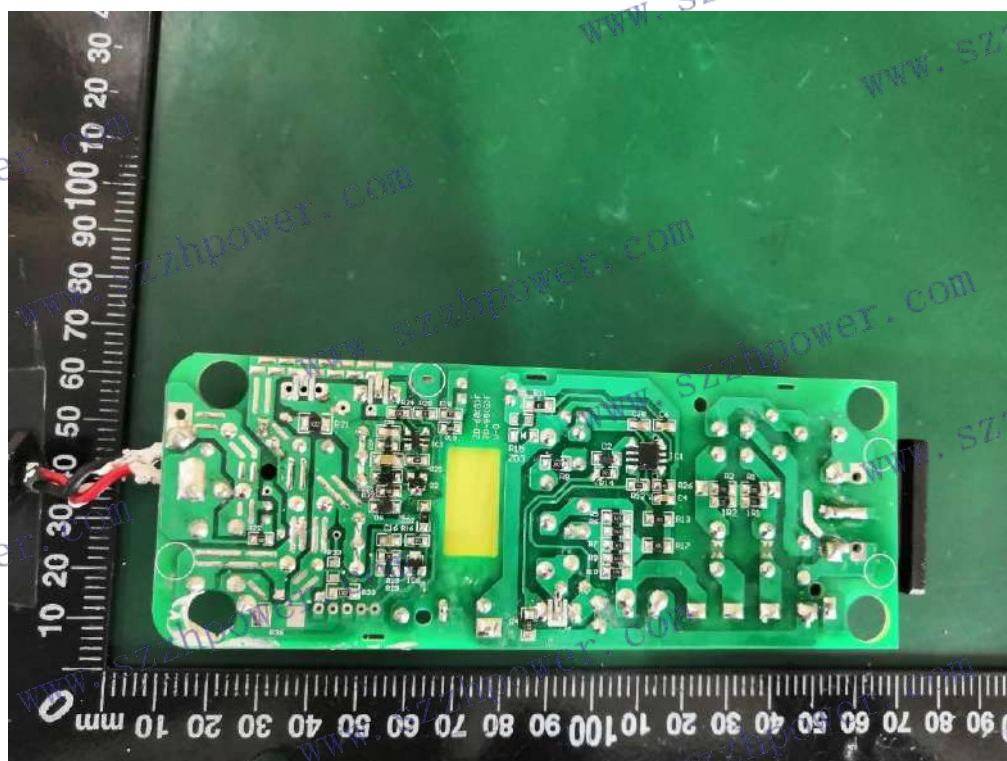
Bottom view of PCB for models ZH100DU-xxxxyyy, KS100DU-xxxxyyy
